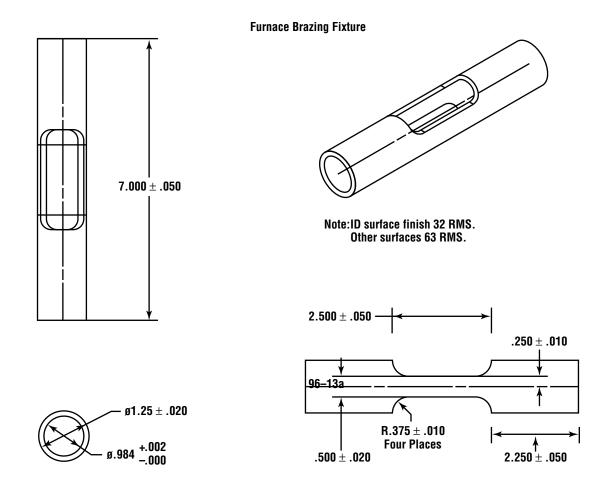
Furnace brazing fixture for tensile specimen.
